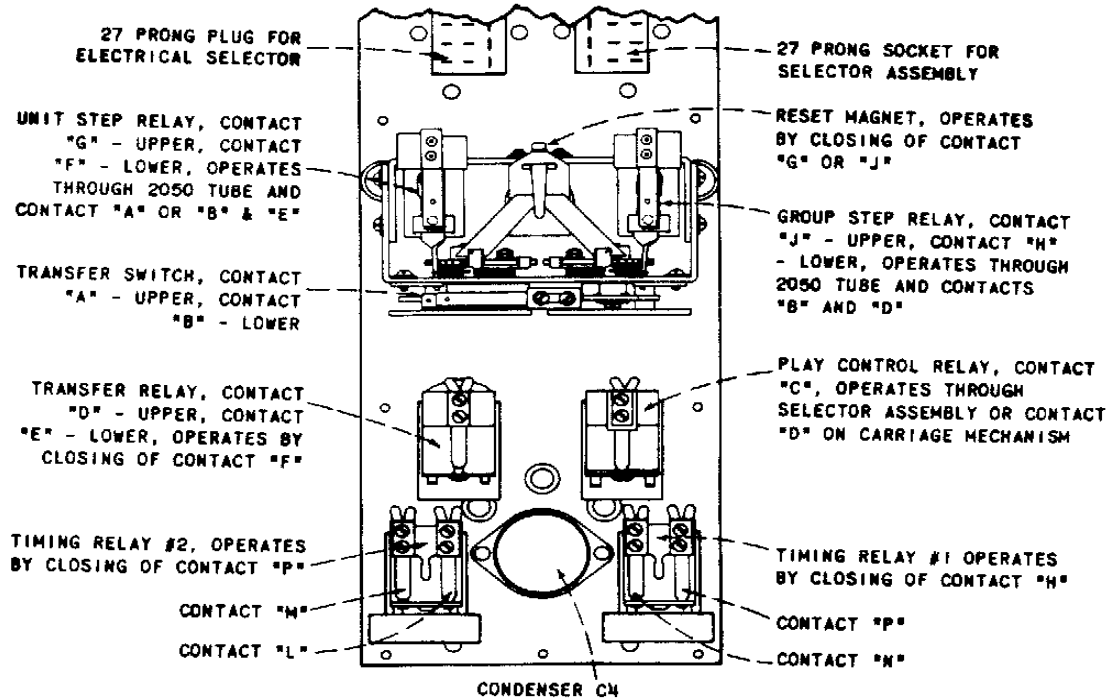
TOP VIEW OF STEP SWITCH & RELAY ASSEMBLY
